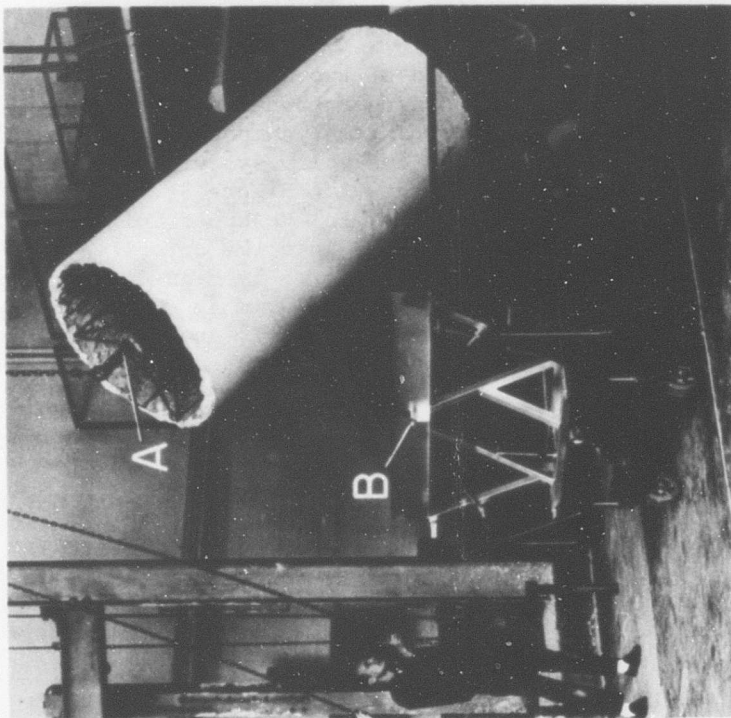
Typical Installation of Plaster Mold Into Autoclave Dolly System: A, Plaster Mold Support Shaft and Lifting Eye; B, Front Saddle Support for Plaster Mold Shaft.
